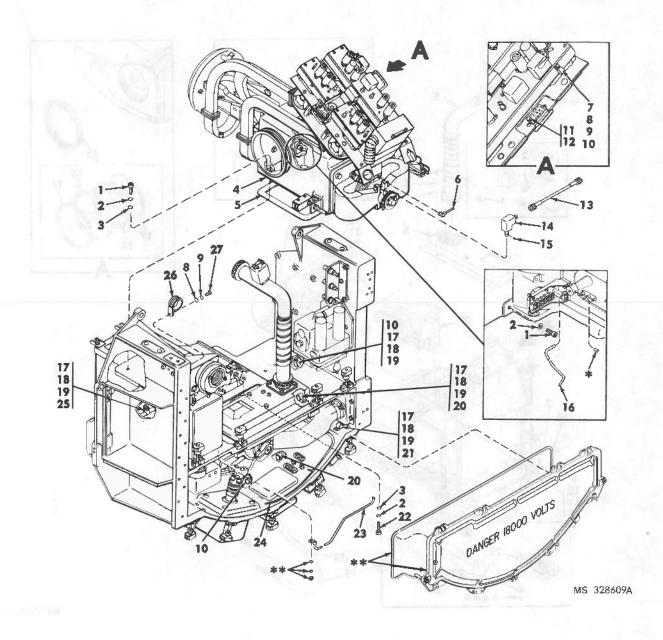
RING ASSEMBLY, ELECTRICAL CONTACT / 9171910/-PARTIAL EXPLODED VIEW
